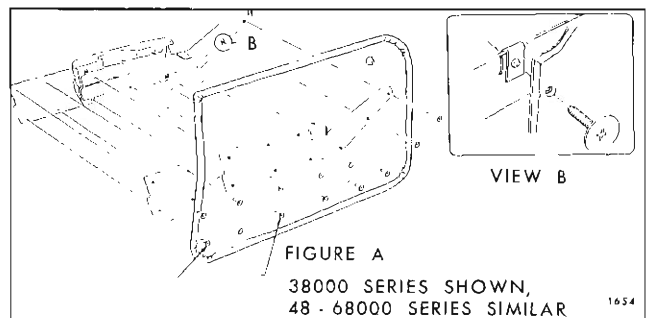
D22—Arm Rest to Door Trim Pad Installation
